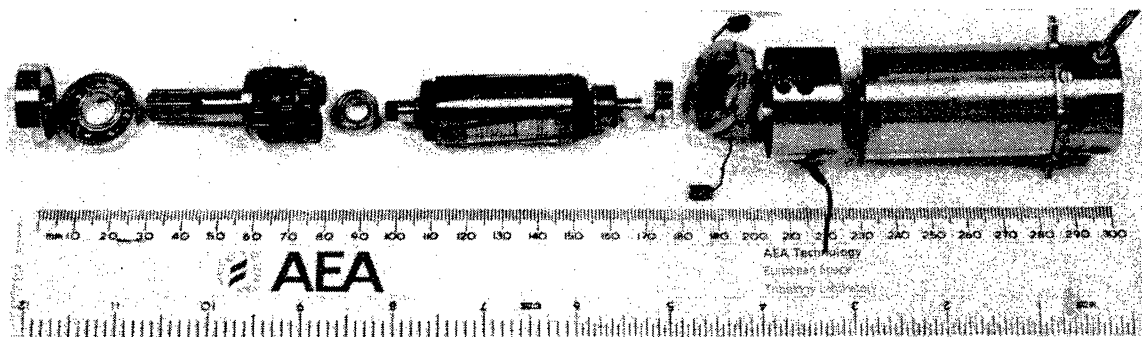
Components of tandem motor/gearhead, with one dismantled motor.
